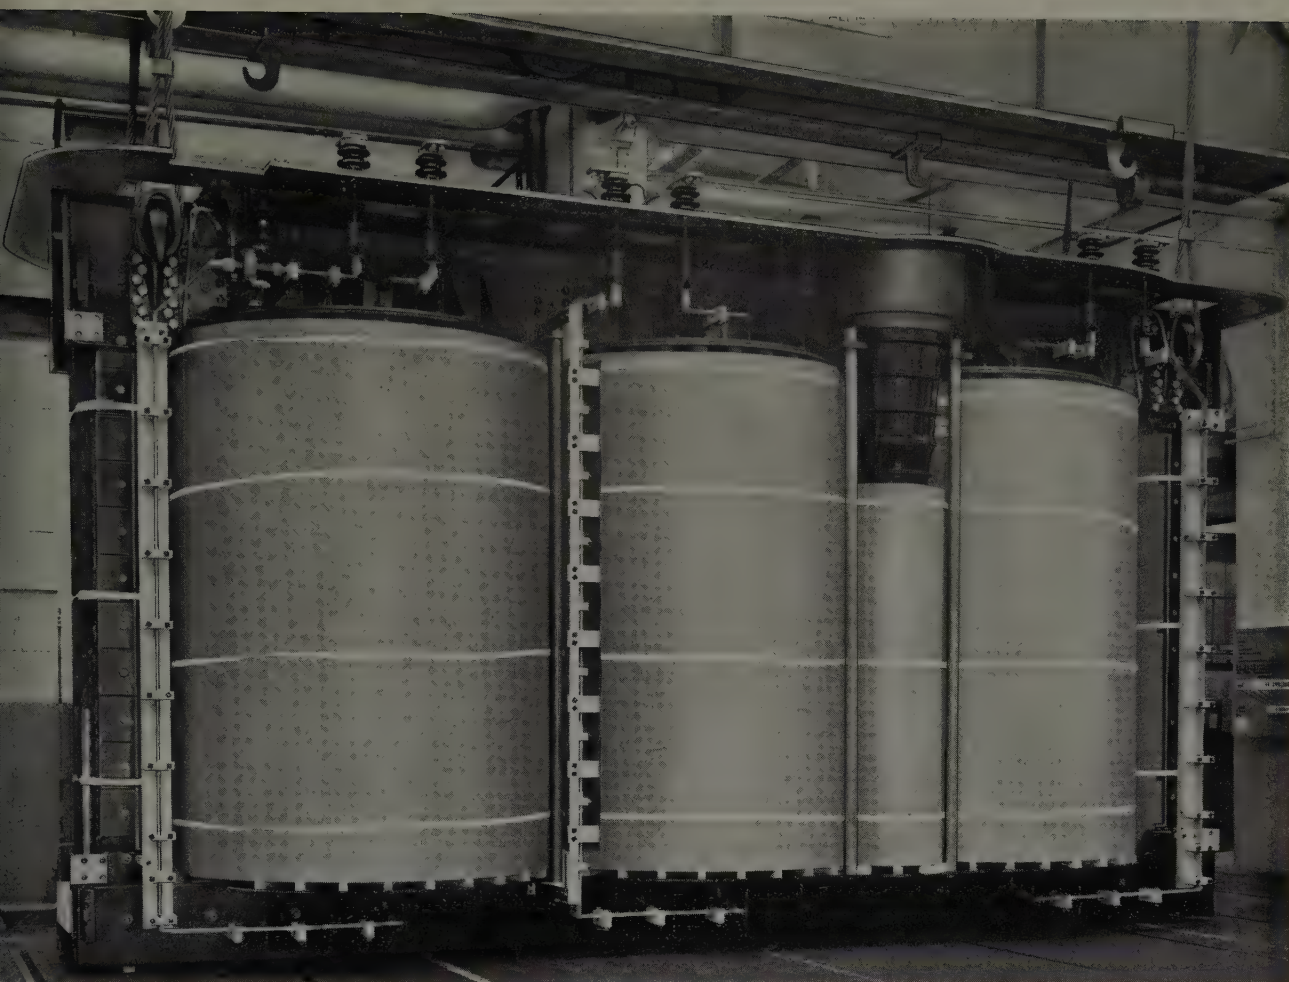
The windings are covered with insulating cylinders. The porcelain for the lower part of the 400 kV bushing is mounted in the cover and the lead from the windings is brought into the bushing through an oil-tight fitting. (54232)
